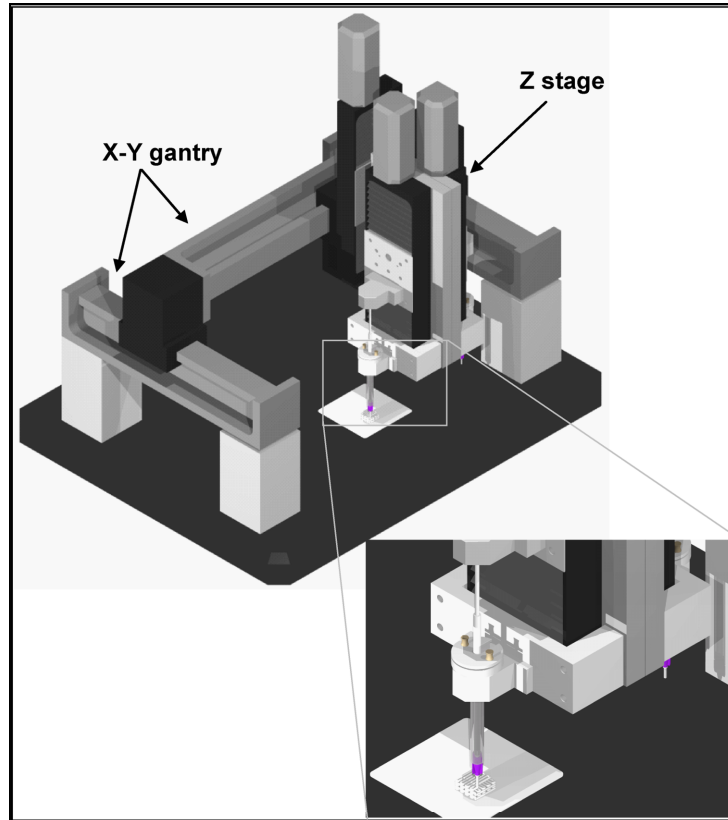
The extrusion based robotic deposition tool showing the x-y-z gantry system
